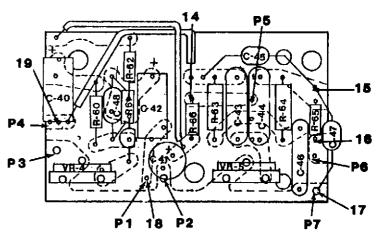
, 2220L 5K Hz. (Driver Training) Filter Board
